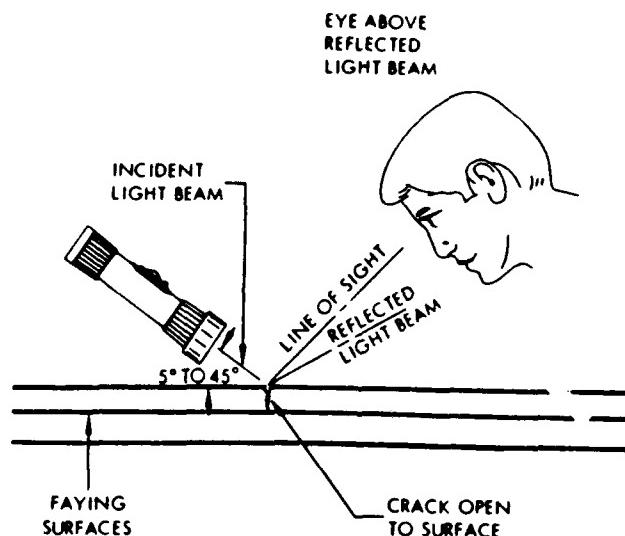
CRACK INSPECTION USING REFLECTED LIGHT TO ENHANCE CONTRAST OF CRACKED SURFACE
